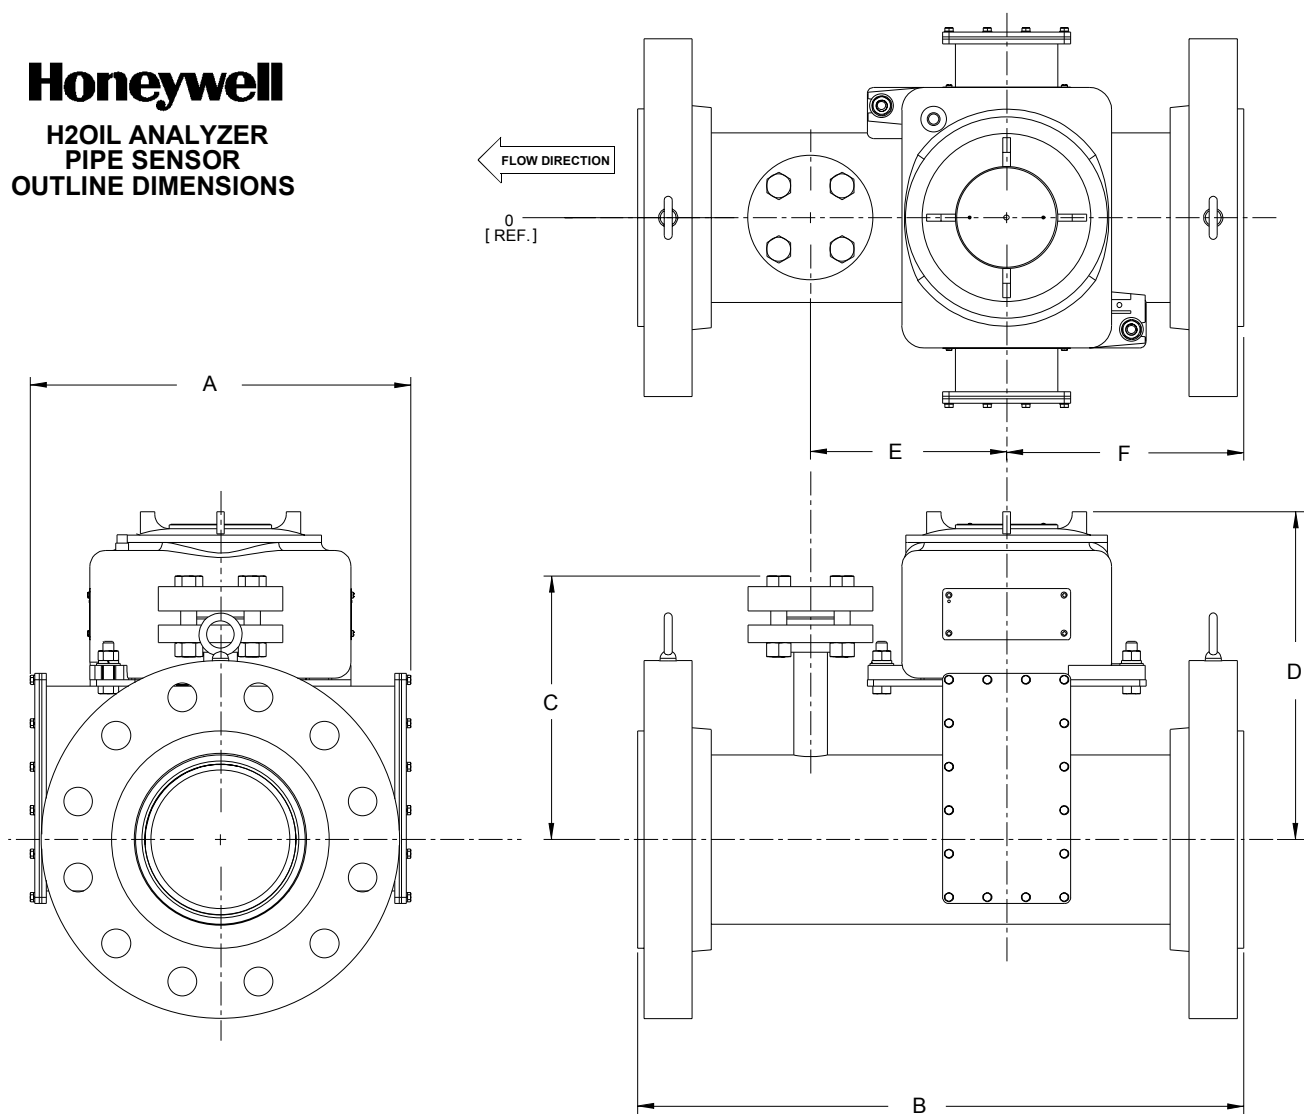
Pipe Sensor Overall Outline Dimensions.
